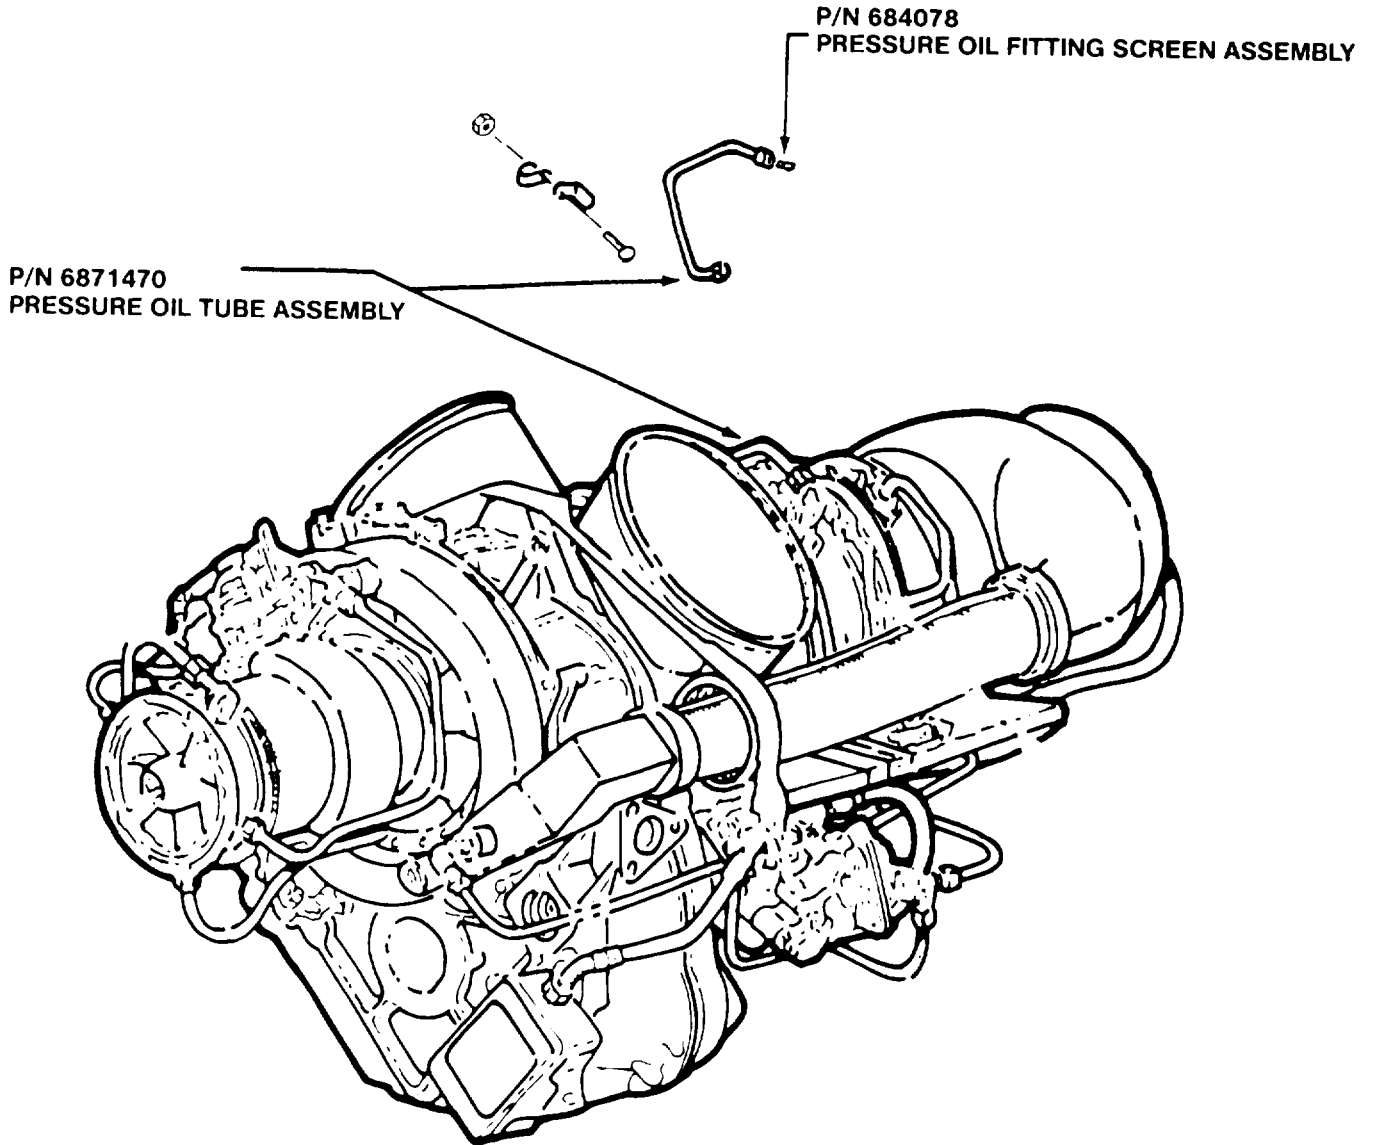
Pressure Oil Tube and Pressure Oil Filter Screen
